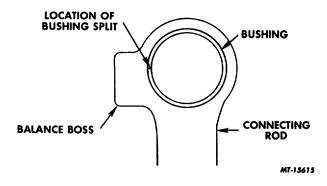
Proper Location of Bushing Split When Installed in Connecting Rod
